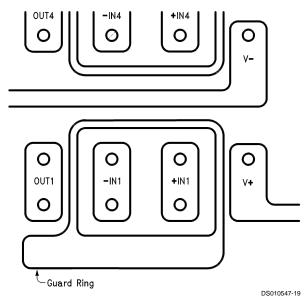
Example of Guard Ring in P.C. Board Layout using the LPC660
